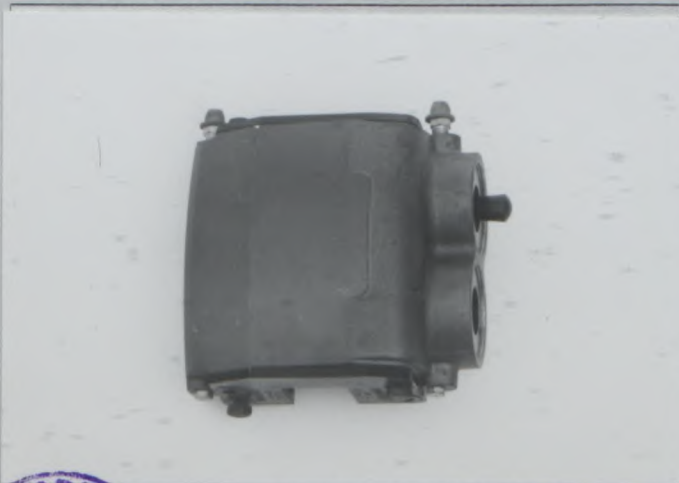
FRONT BRAKE CALIPER, TYPE B
